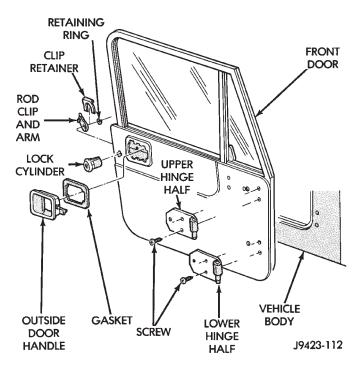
Key Lock Cylinder and Door Handle Removal/Installation
